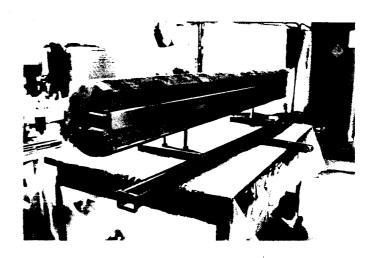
Magnet assembly before the shield plate and the end vacuum caps are welded in place. A spare coil is on the side.
